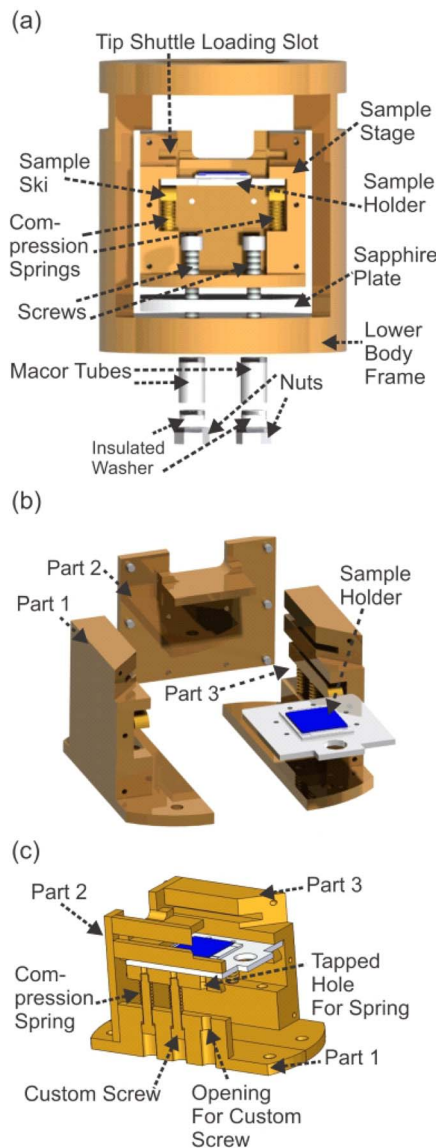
Sample stage/lower body assembly. (a) Side-view of sample stage installed in the lower body; (b) sample stage disassembled into three main parts; (c) assembled sample stage with cross-section of a spring-loaded sample ski, in which one of the three springs is removed.
